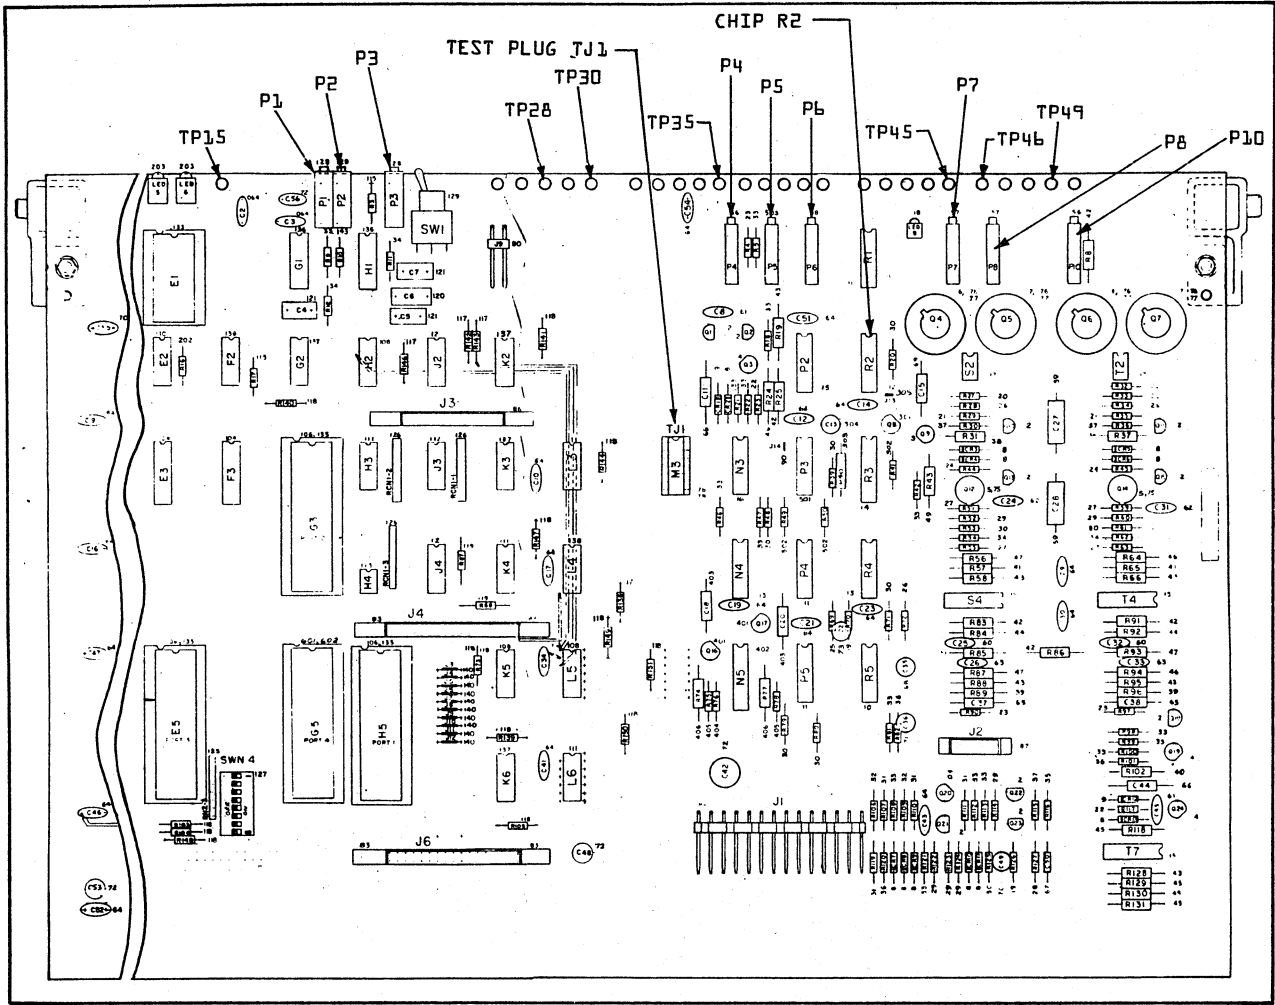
CONTROLLER AND HEAD LOGIC BOARD ASSEMBLY (CARD LOCATION 1PC2)
